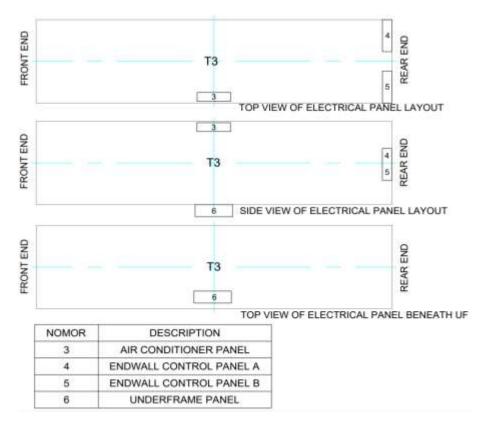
Arrangement Layout of T3 Carriage Electrical Panel
